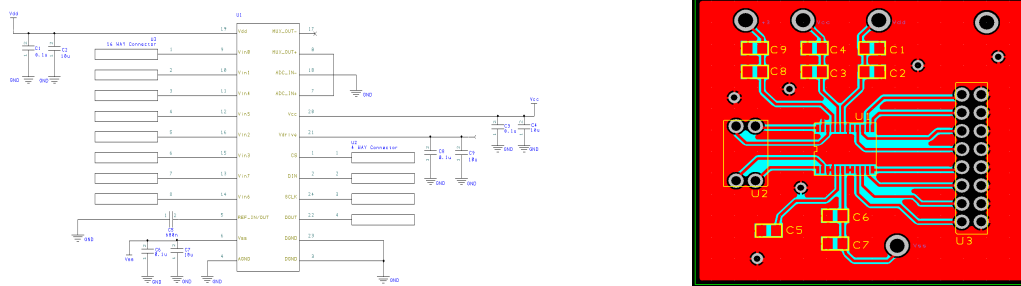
Recommended schematic and PCB layout for AD7329 designed using RS design spark
